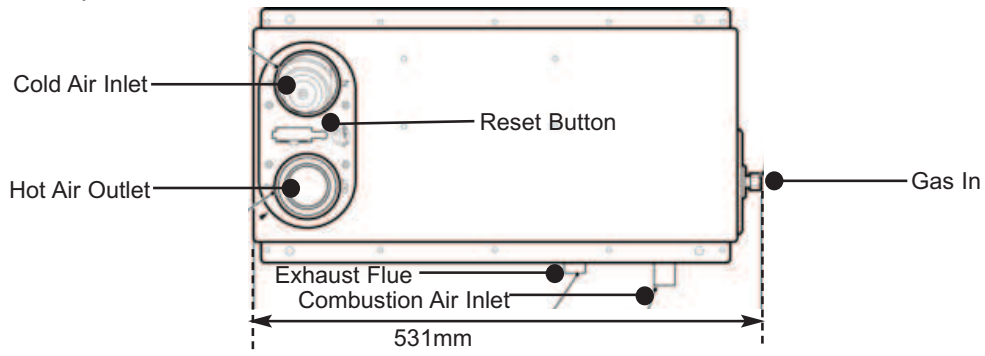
External (Underfloor) Installation - Plan View - SH2211 / SC2211
